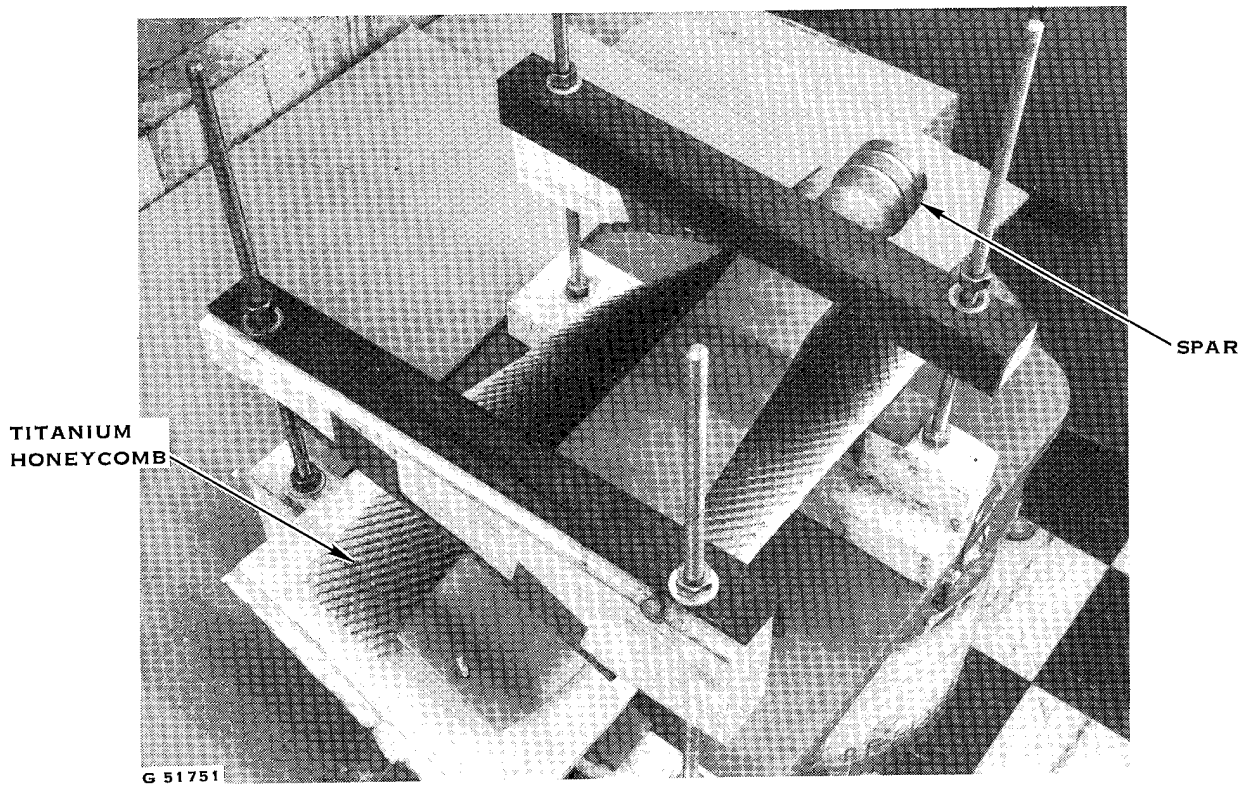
ASSEMBLE JIG USED FOR DETAIL PART ASSEMBLY PRIOR TO METAL JOINING
